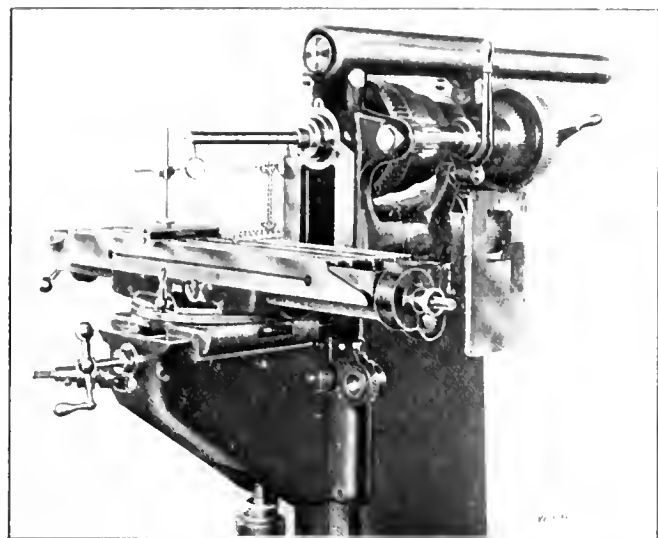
Test to show Parallelism of Table with Spindle, and to indicate if Taper Hole runs True. Test is made by shifting Indicator across Table.
